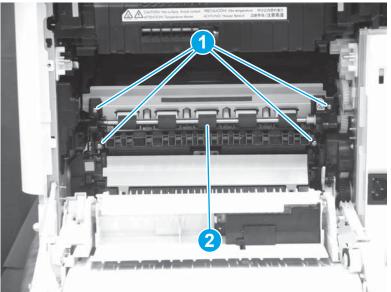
Disconnect one connector and remove the transfer assembly
